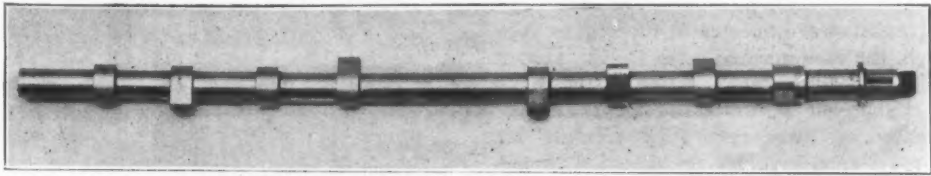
A Solid Camshaft Ground in the Camshaft Grinder.
